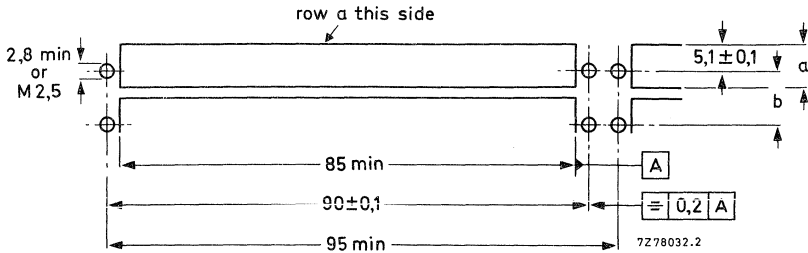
Panel cut-out; see Table 4 for dimensions a and b.
